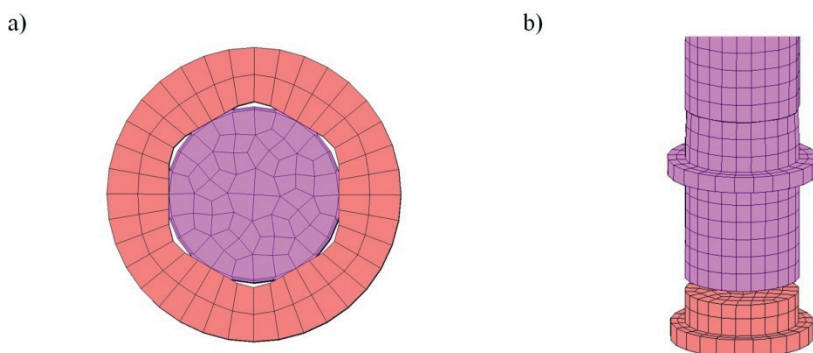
Sleeve and pillar connection: a) view of the sleeve shape, b) pillar - plate assembly of tool system.
